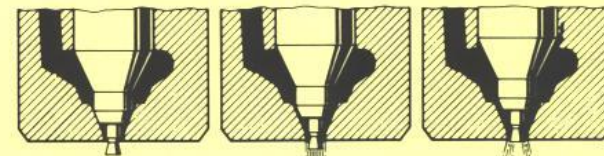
Pintle nozzle (DN..), with cylindrical pintle (narrow spray)
